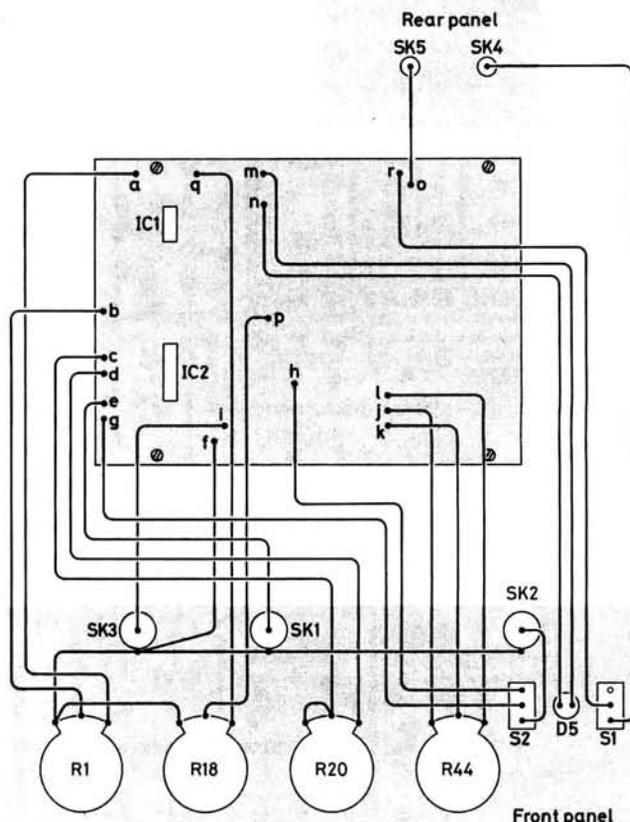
Interconnecting wiring diagram between the p.c.b. and the panel mounted components
